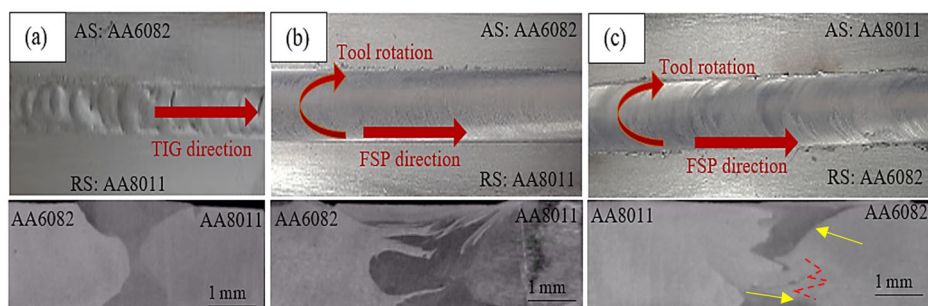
Surface macrographs, (a) TIG welded, FSPed-TIG welded (b) AA6082-AA8011 and (c) AA8011-AA6082.
